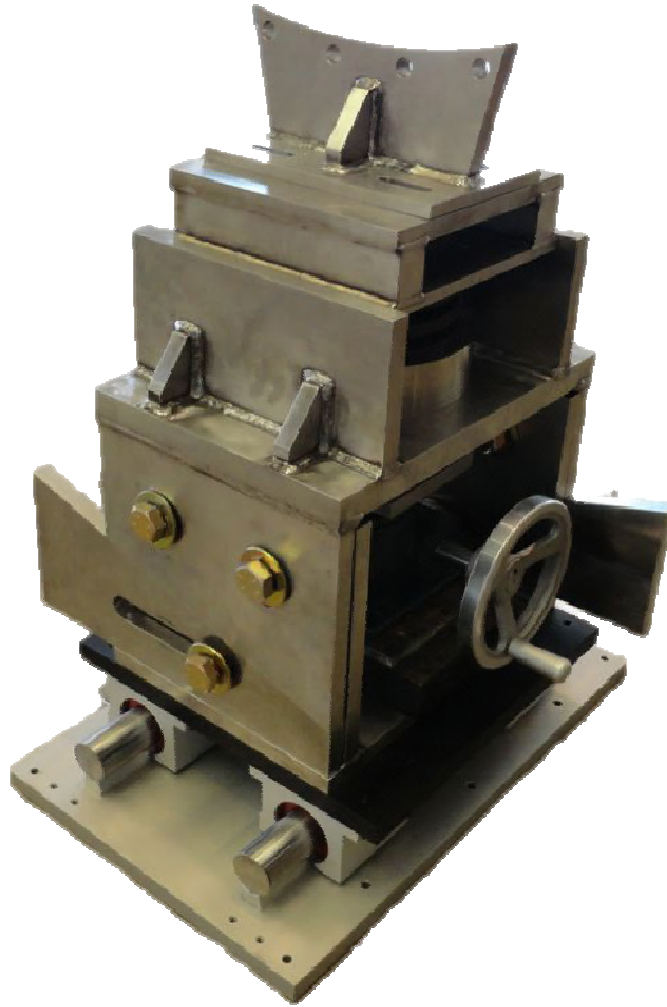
This is the final assembly of all of the parts from Solar Turbines, PBC Linear, Joyce Jacks, and Fasstenal.
